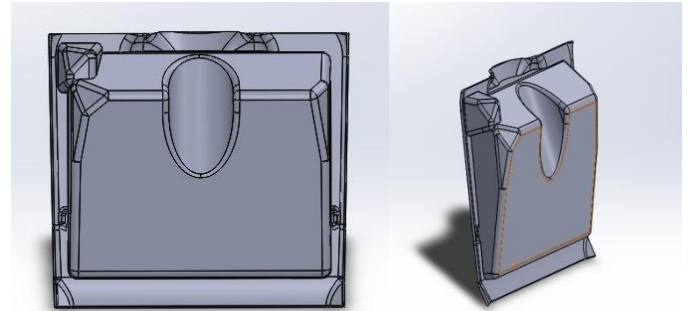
Final air box design that was thermal-formed by Sportech so that it would conform to the tank to prevent any leaks when plastic welded together.
